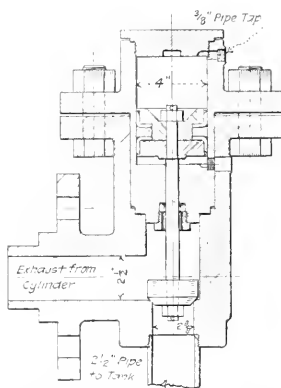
CAST-STEEL EXHAUST VALVE USED TO REPLACE VALVE IN FIG. 4
